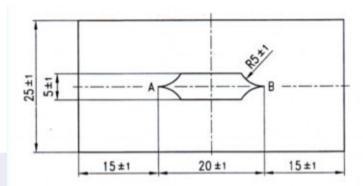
Test piece for double edge tear (all dimensions in millimetres ± 1 mm, R = radius)
